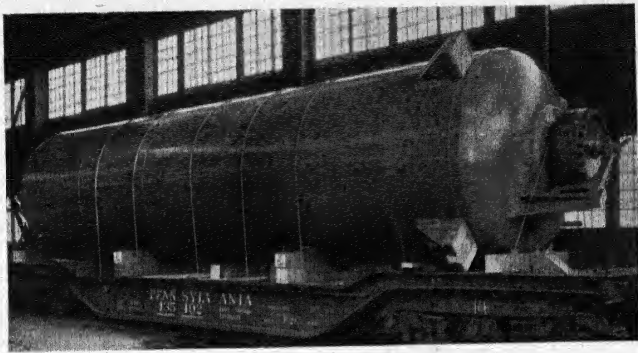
Large welded vessel for oil industry by Blaw Knox & Co., Ltd.
